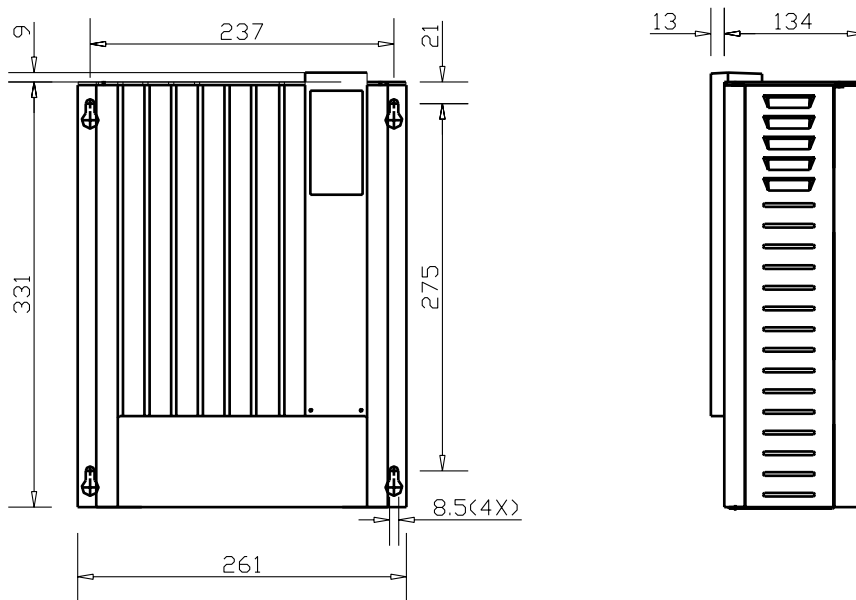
Mounting points Mass Sine 12/1200, 24/1500 230V / 50Hz and Mass Sine 12/1000, 24/1000 117V / 60Hz.
